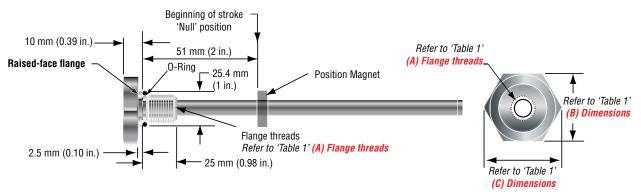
Style 'HP' pressure pipe (raised-face flange shown with U.S. customary threads)
